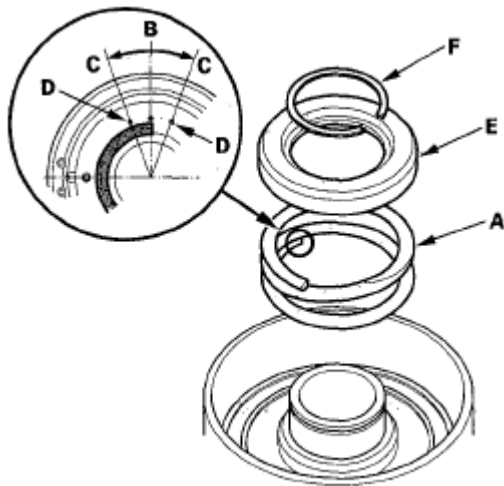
Identifying 5th Clutch Return Spring Mark Reference
